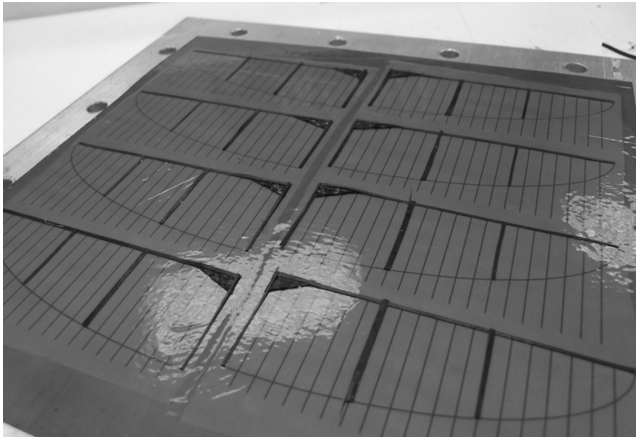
Parallel batten wings manufactured with hand layup method assembled on a flat plate before curing cycle.
